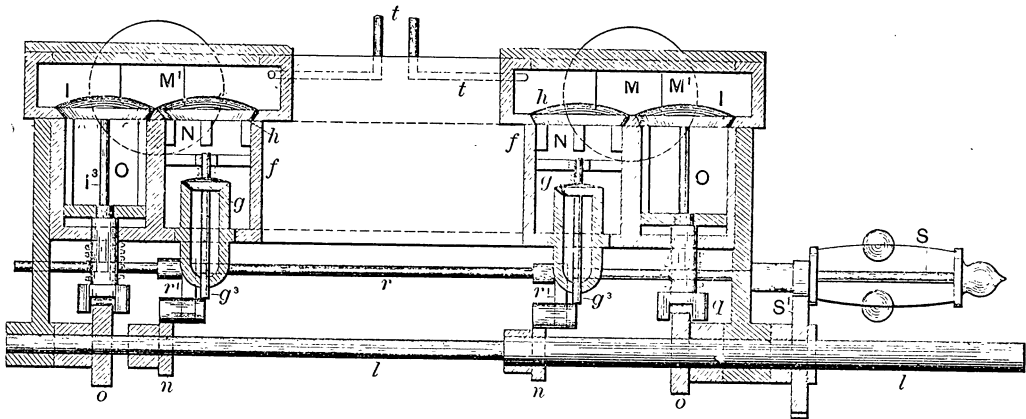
Longitudinal Vertical Section through Centers of all Valves and Valve Mechanism.
